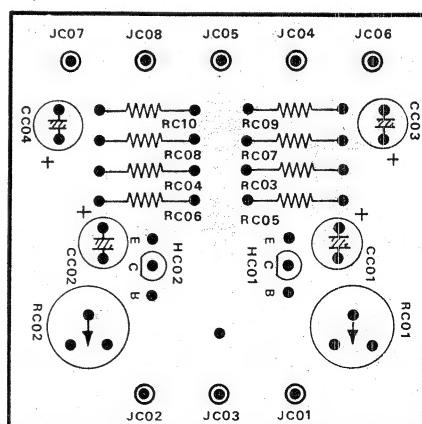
Dolby Level Board – PC01 Component Assembly Diagram
